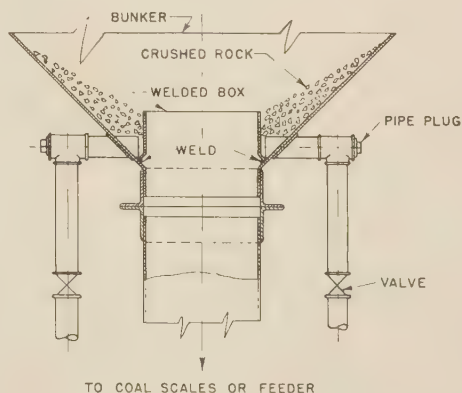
ARRANGEMENT TO PREVENT RUN-OFF WATER ENTERING PULVERIZER
